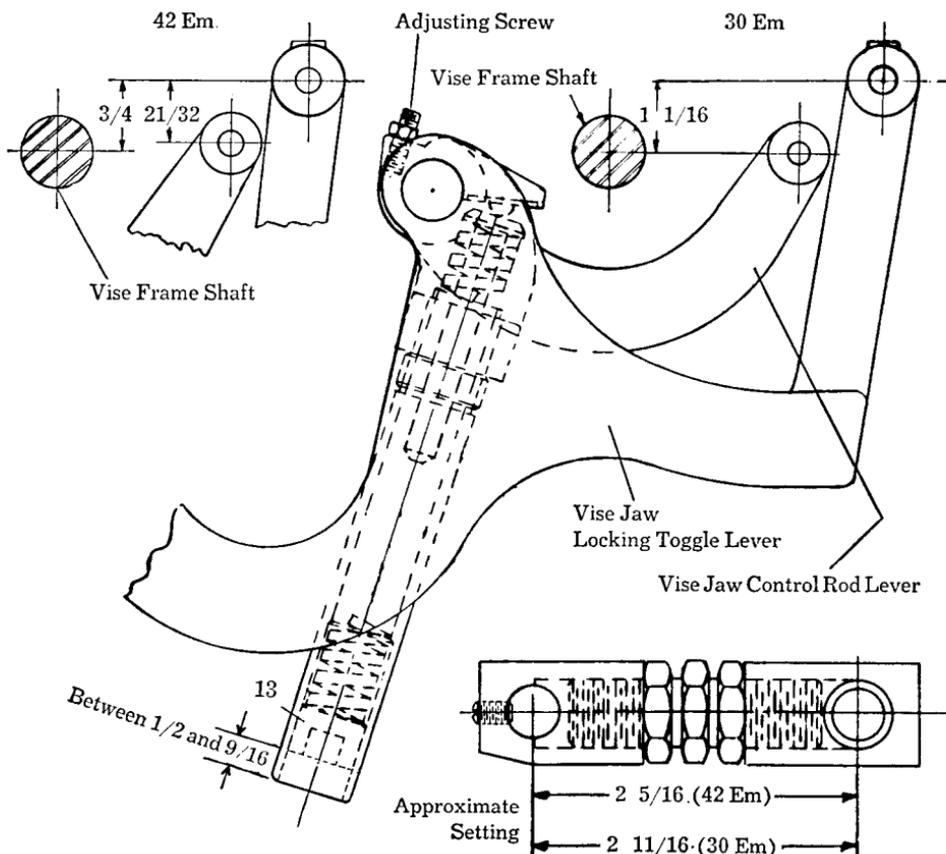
View showing standard dimensions of vise jaw locking toggle, vise jaw control rod lever and locking toggle slide connecting block.
